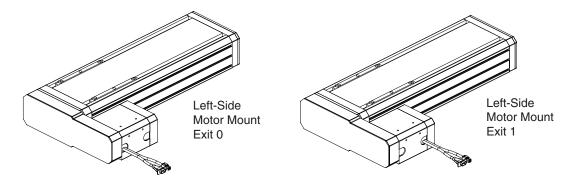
Left-Side Motor Mount, Harness Exit Locations
